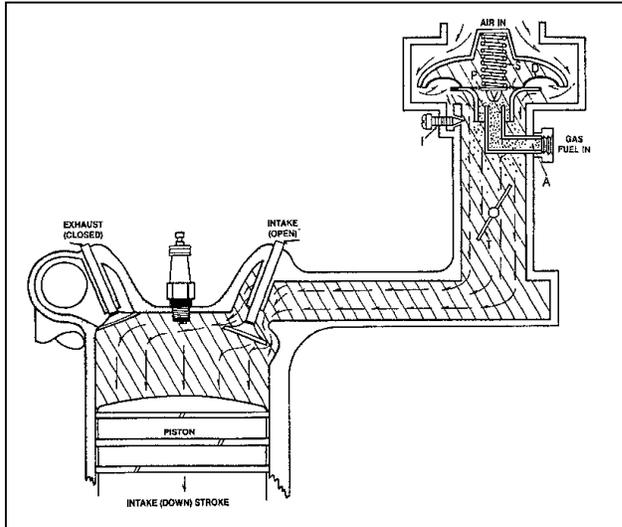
Gas mixing valve in operation, schematic (Impco). S metering spring, D diaphragm, P vacuum transfer passage, V gas metering valve, I idle air bypass adjustment, A power mixture adjustment, T throttle valve.
